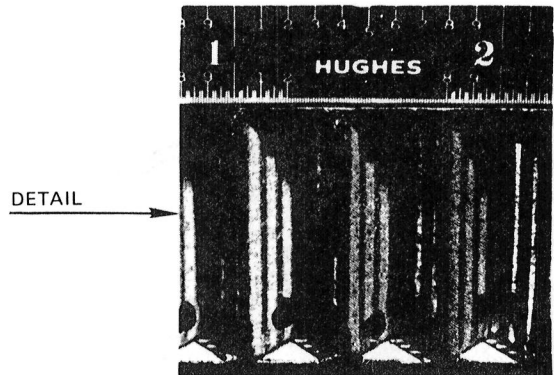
Completed honeycomb panel prior to processing and final assembly.
